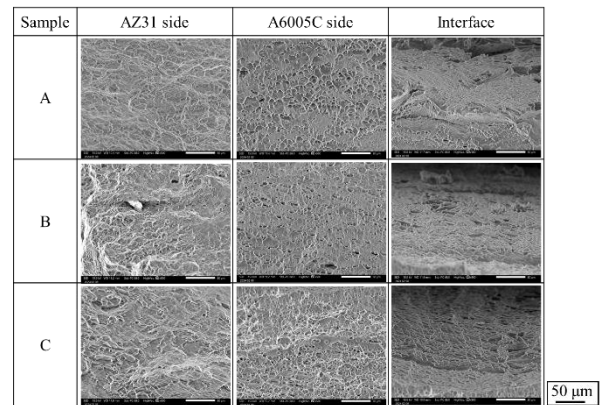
Fracture surface after tensile test after rolling.
